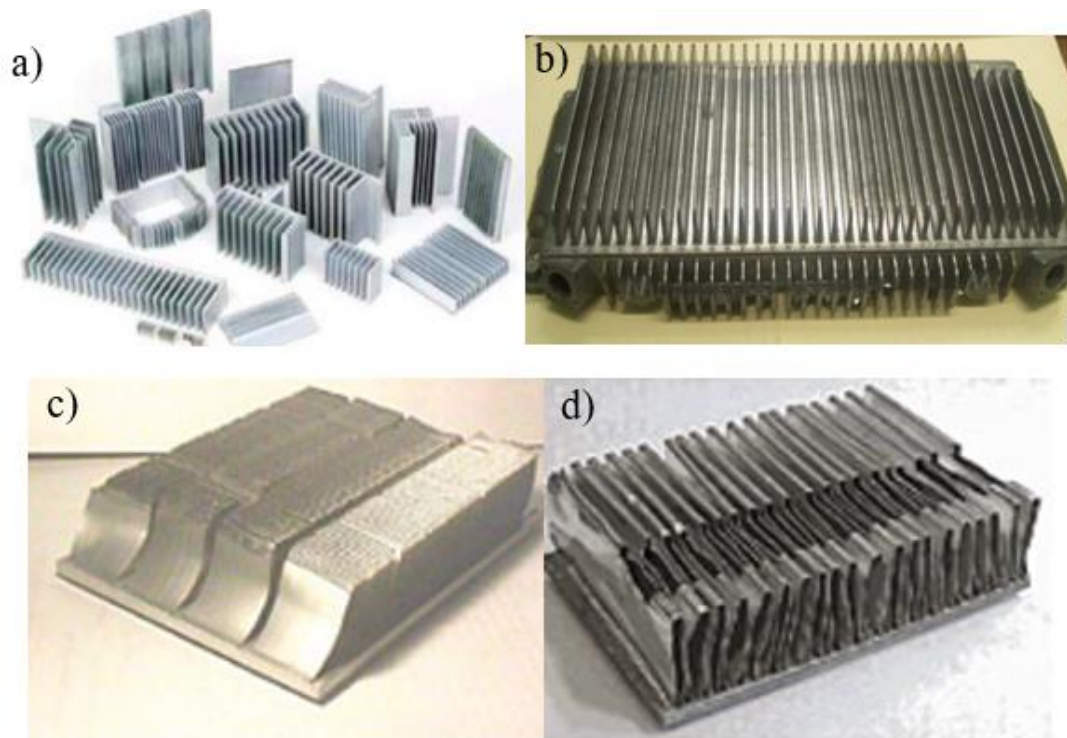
4. Examples of heat sinks produced by a) extrusion b) die casting c) skiving d) folding [17]–[19].
